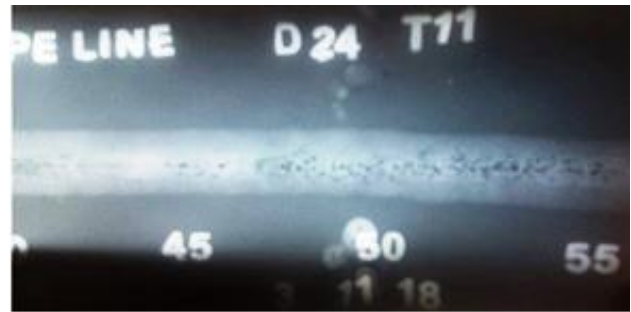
Radiographic Test report of of initial FCAW-GMAW process welds with cluster porosity.
